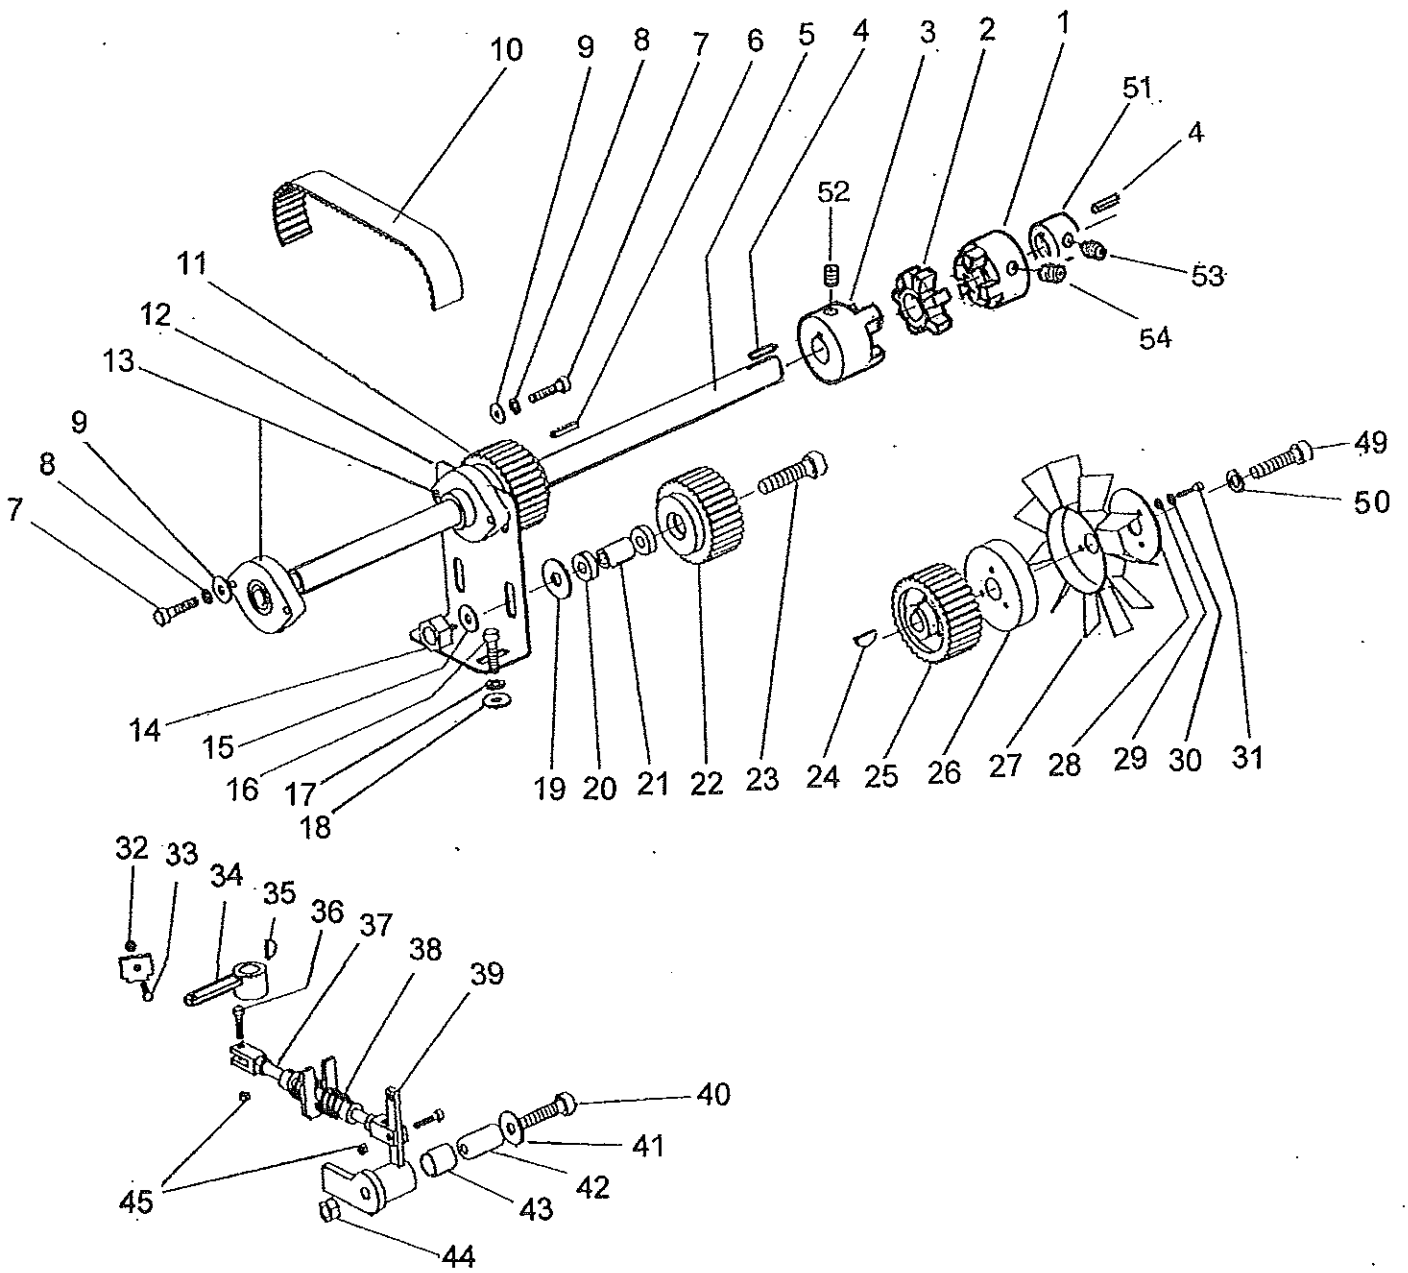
DRIVE SHAFT & CONTROL ASSEMBLY
